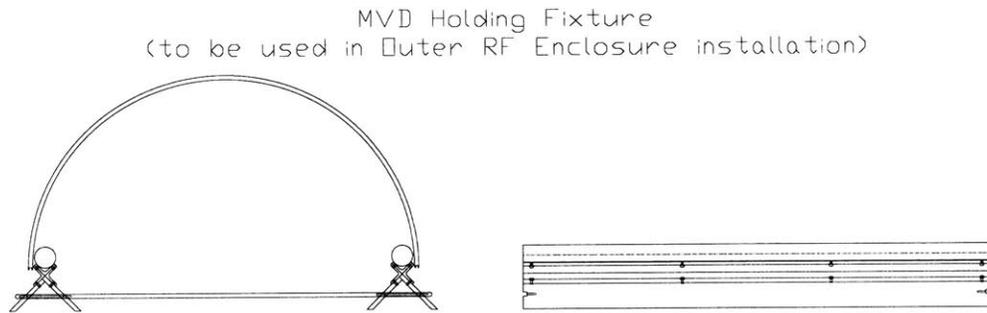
Conceptual assembly drawing of MVD holding fixture
